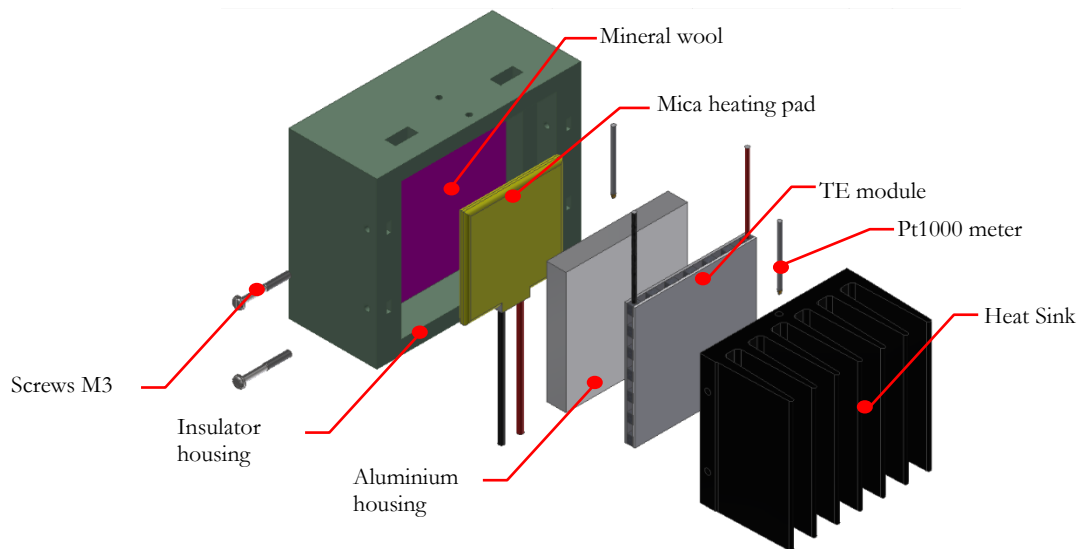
CAD model for lab testing of the GM200-49-45-25
